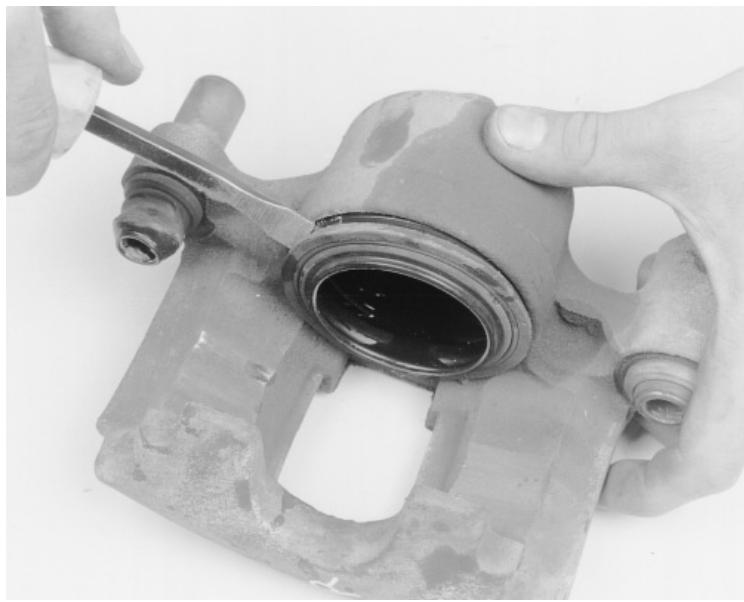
Use a prytool to carefully pry around the edge of the boot ...
